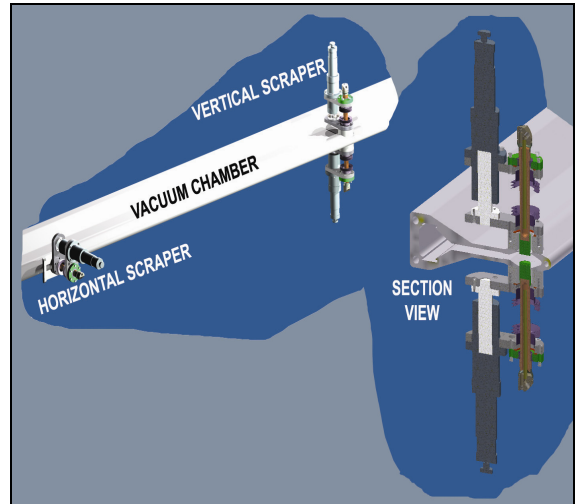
(top left) Sectional view of APS scraper assembly, round blades (closed).
